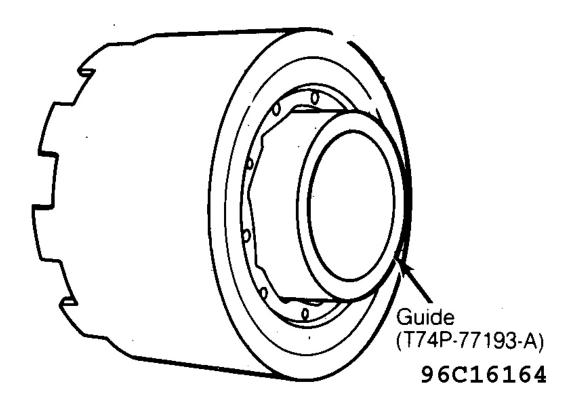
Clutch Replacing Guide Used to Install One-Way Clutch Inner Race Courtesy of FORD MOTOR CO.
